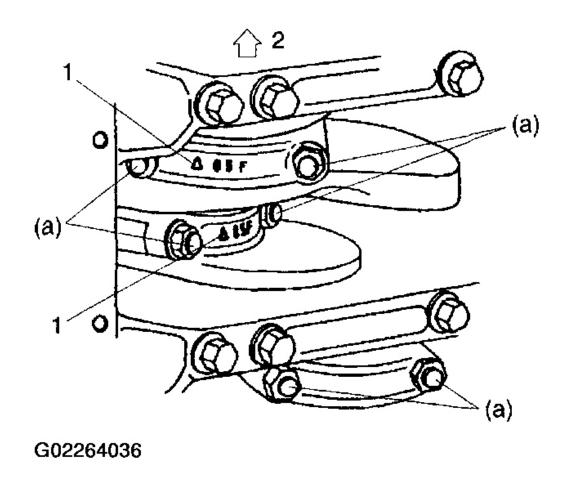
Installing Bearing Cap With Mark On Cap To Crankshaft Pulley Side Courtesy of SUZUKI OF AMERICA CORP.
